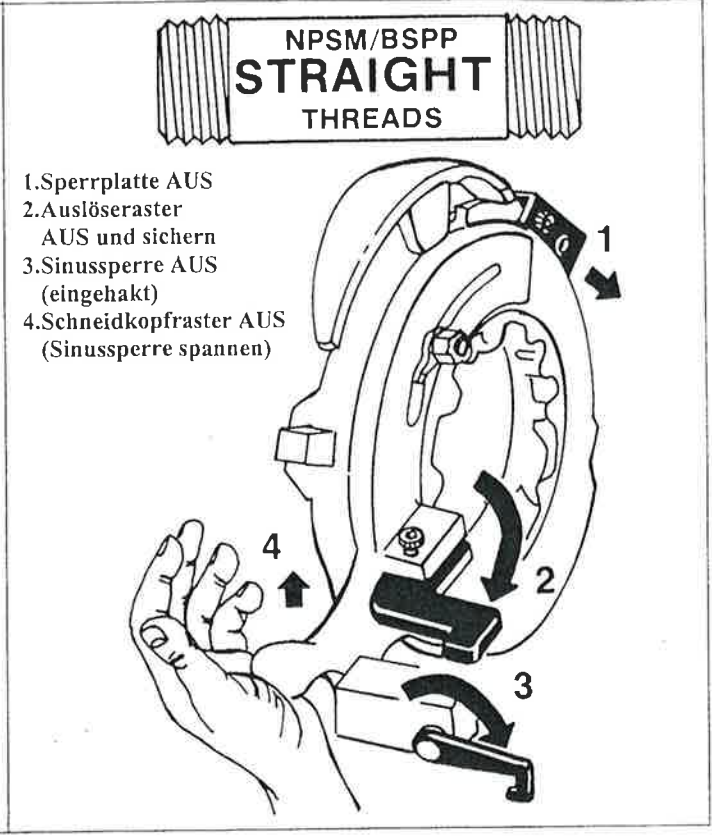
Setting No. 714 or 914 Self-Opening Die Head for NPSM or BSPP Threads
